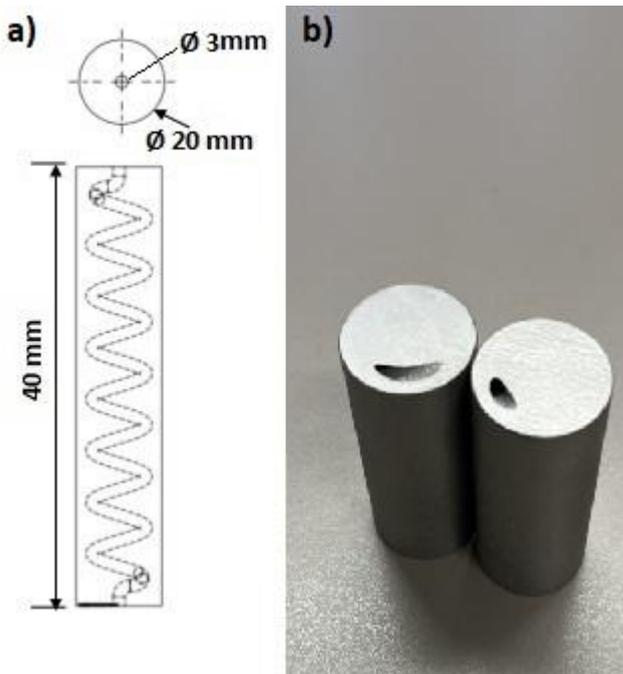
a) Dimensions of the test specimen, b) fabricated test specimen by DMLS
